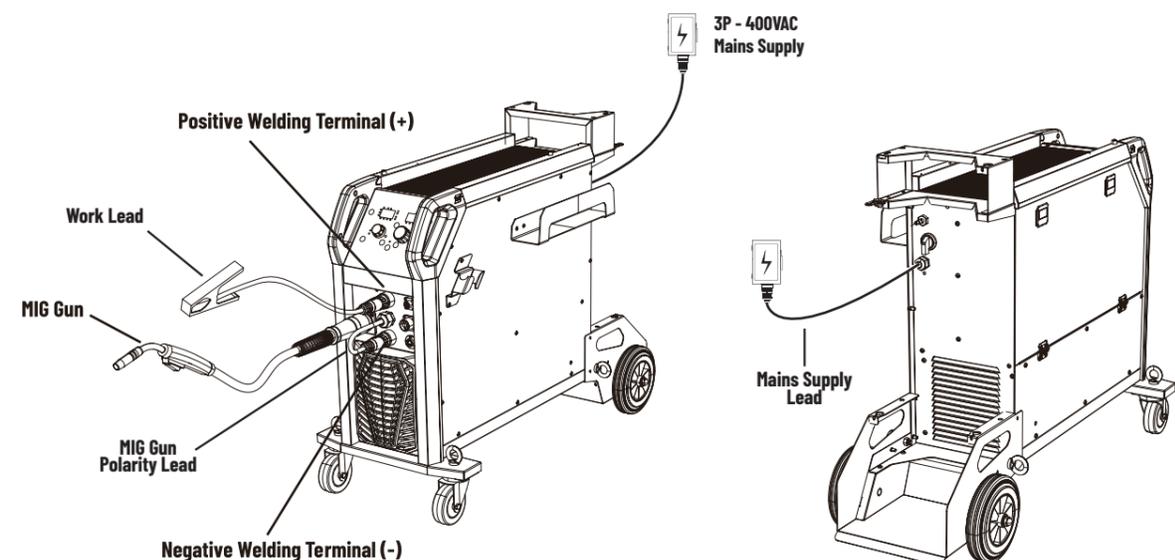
Setup for MIG Welding with Gasless MIG Wire
